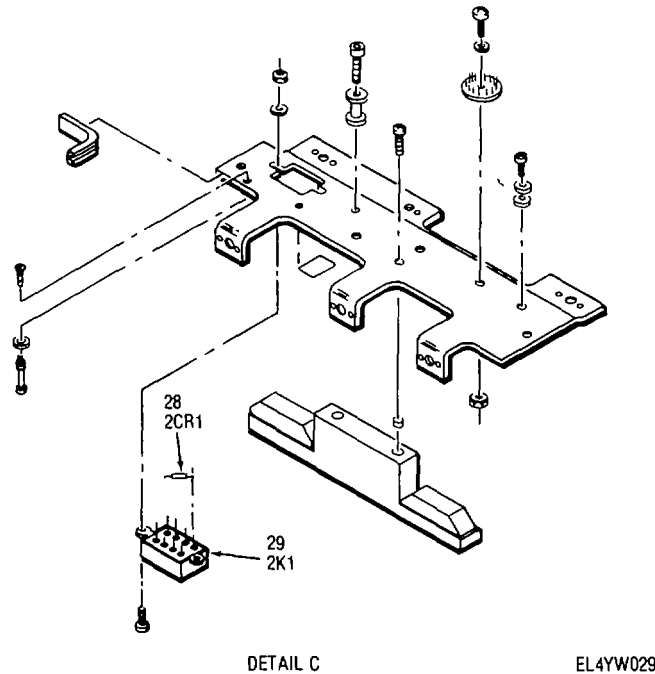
Encoder exploded view (sheet 8 of 8).
